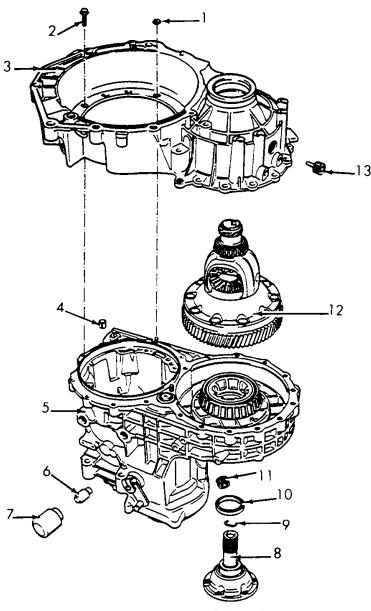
Exploded View Of Bearing Housing & Axle Shaft Assembly Courtesy of VOLKSWAGEN UNITED STATES, INC.
